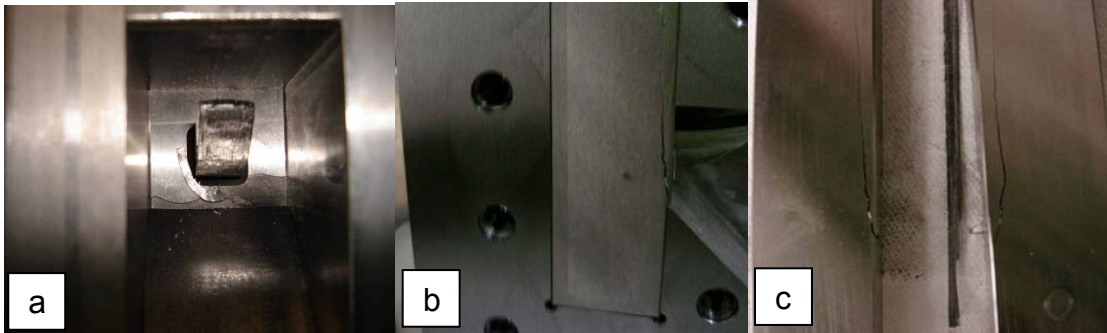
First channel failure. a) Extrusion of aluminum through cracks below exit channel; b) side-view of channel failure; c) failure of both halves of die channel
